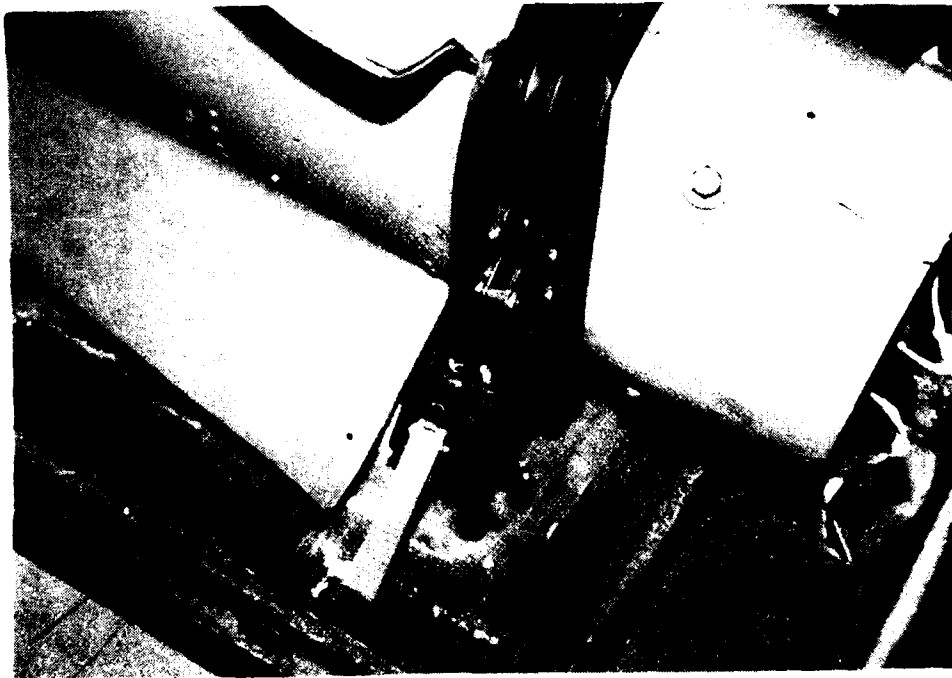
DISENGAGED LATCH, SIDE 4 AFT CLAMP.
